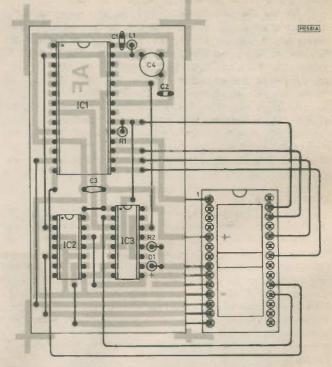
P.c.b. and component layout of the Speech Synthesiser
